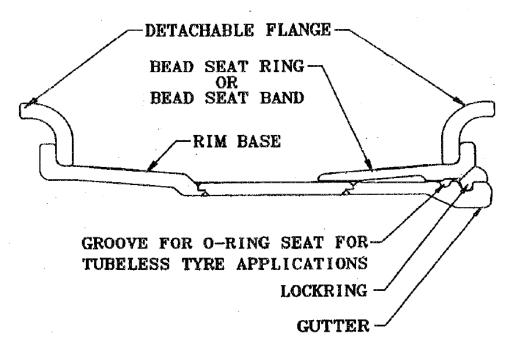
FIVE-PIECE RIM NOMENCLATURE
